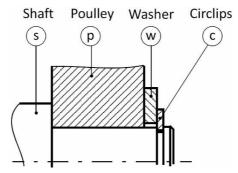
Drawing in nominal geometry i.e. without gap nor interference between parts, of the assembly of a pulley at the end of a shaft
